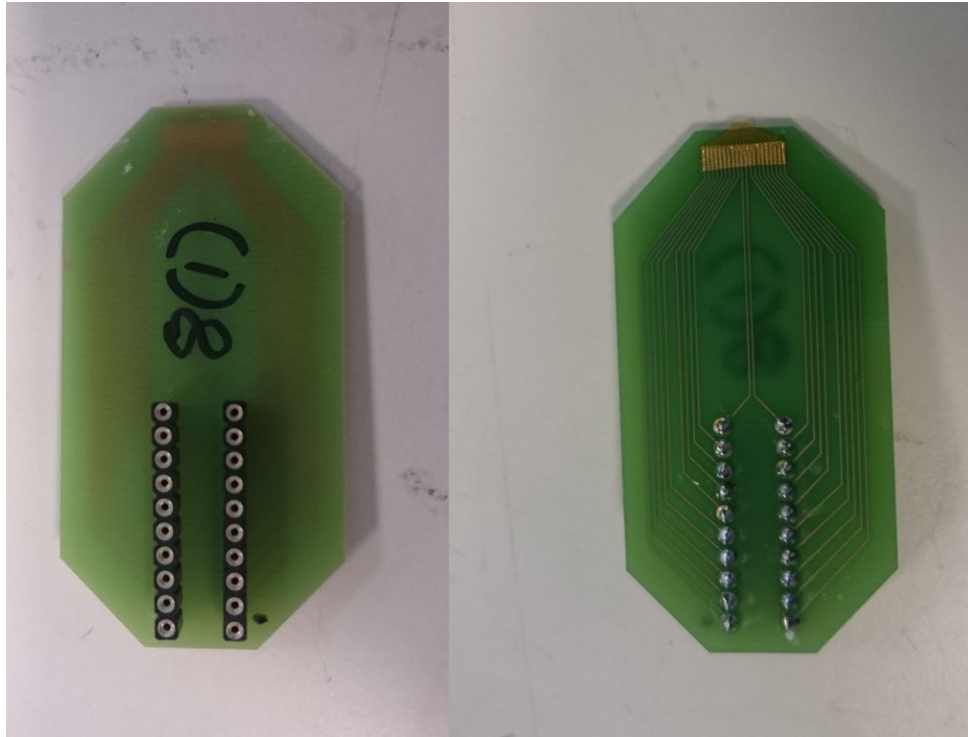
Custom ordered interface PCBs, the SPNI is directly bonded to the exposed contacts at the top of the right image. The impedance analyser test pins could then be inserted into the SIL connectors.
